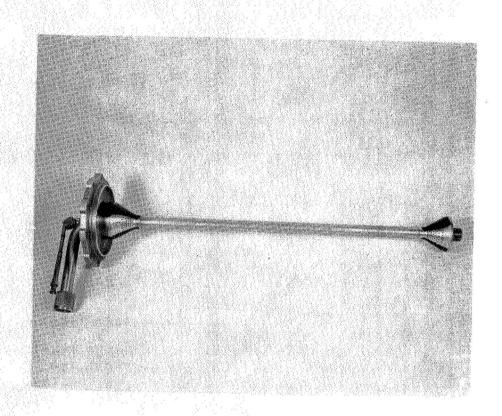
DIFFUSER TUBE ASSEMBLY - SHOWS MODIFIED CONES
